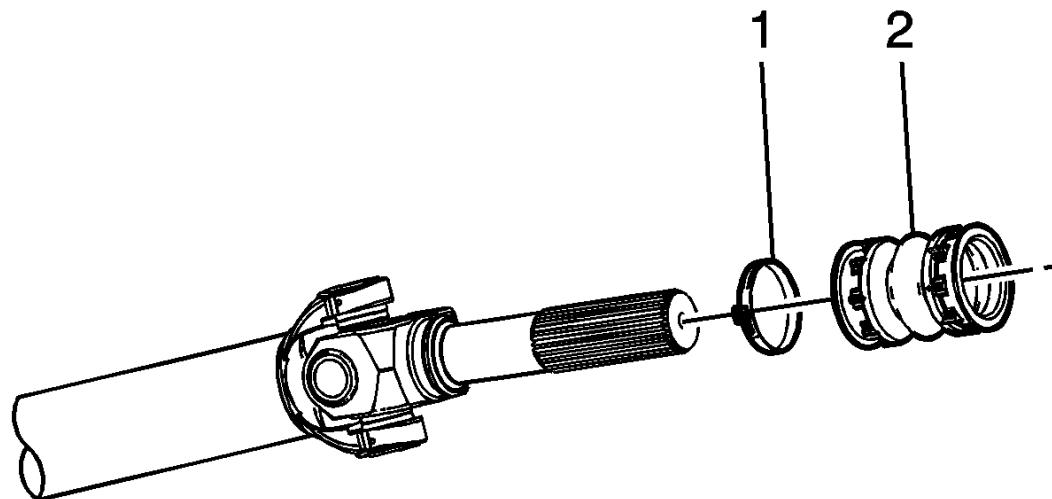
Propeller Shaft, Clamp And Shaft Boot
